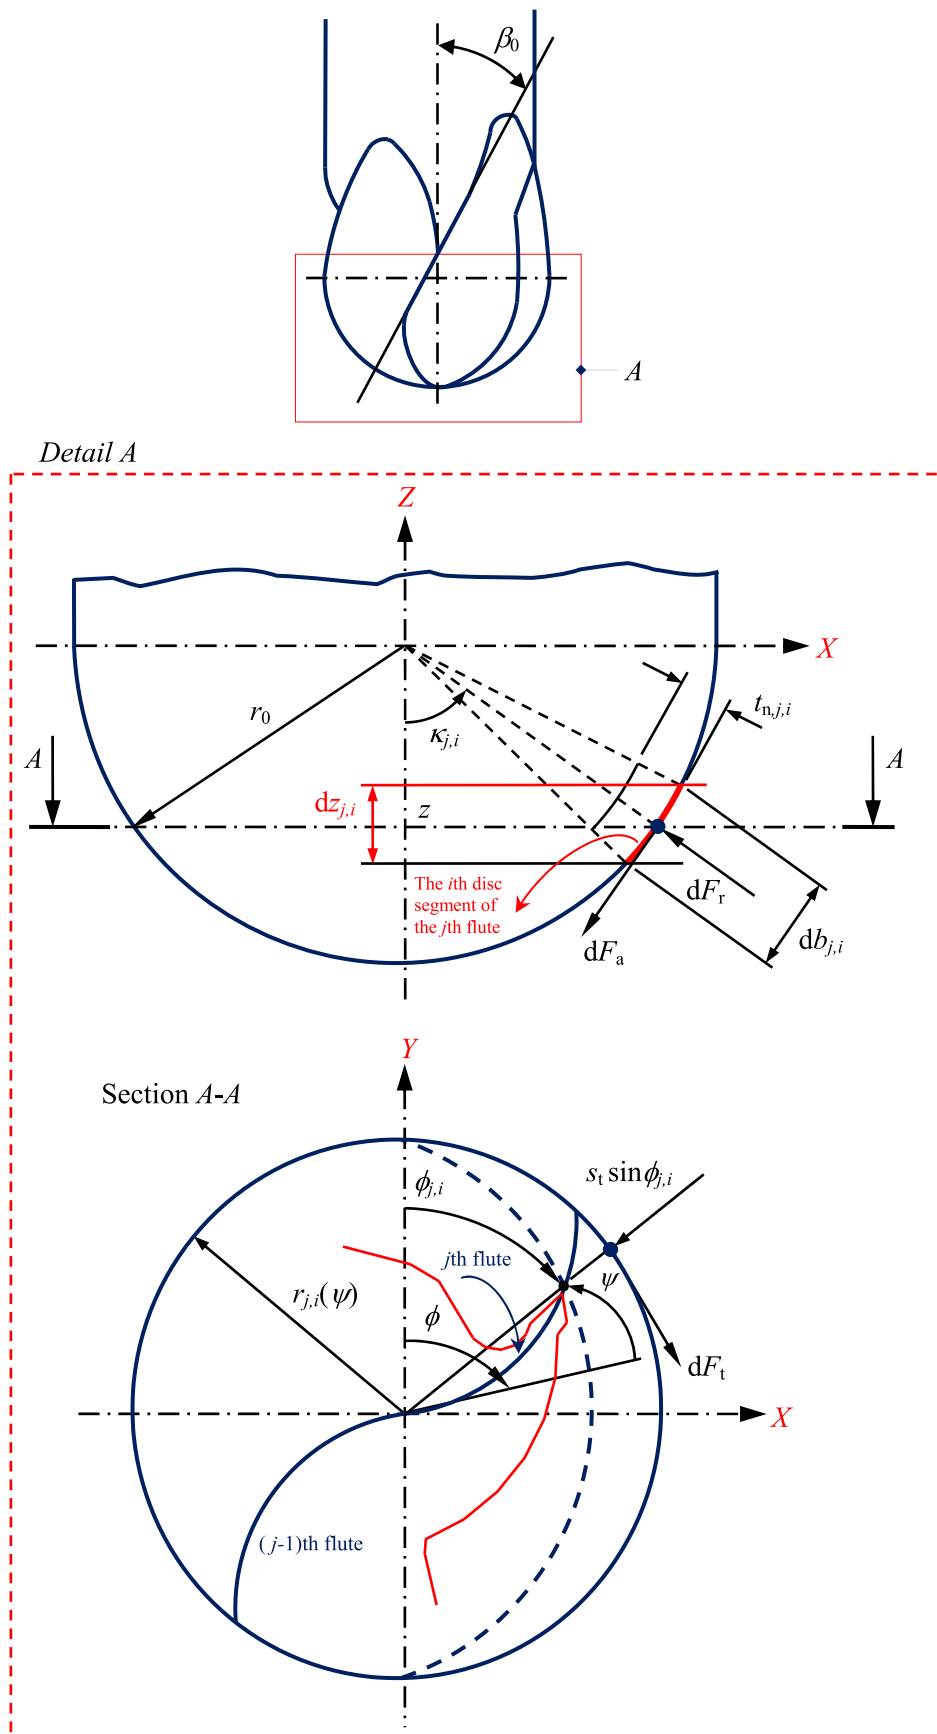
Cutting forces and geometry of the ball-end milling cutter
